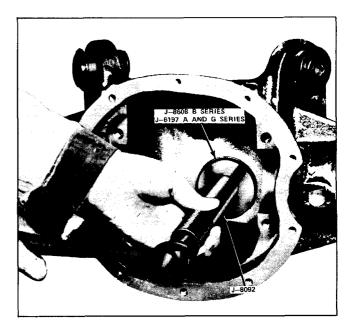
A-30 Installing Rear Pinion Bearing Outer Race
